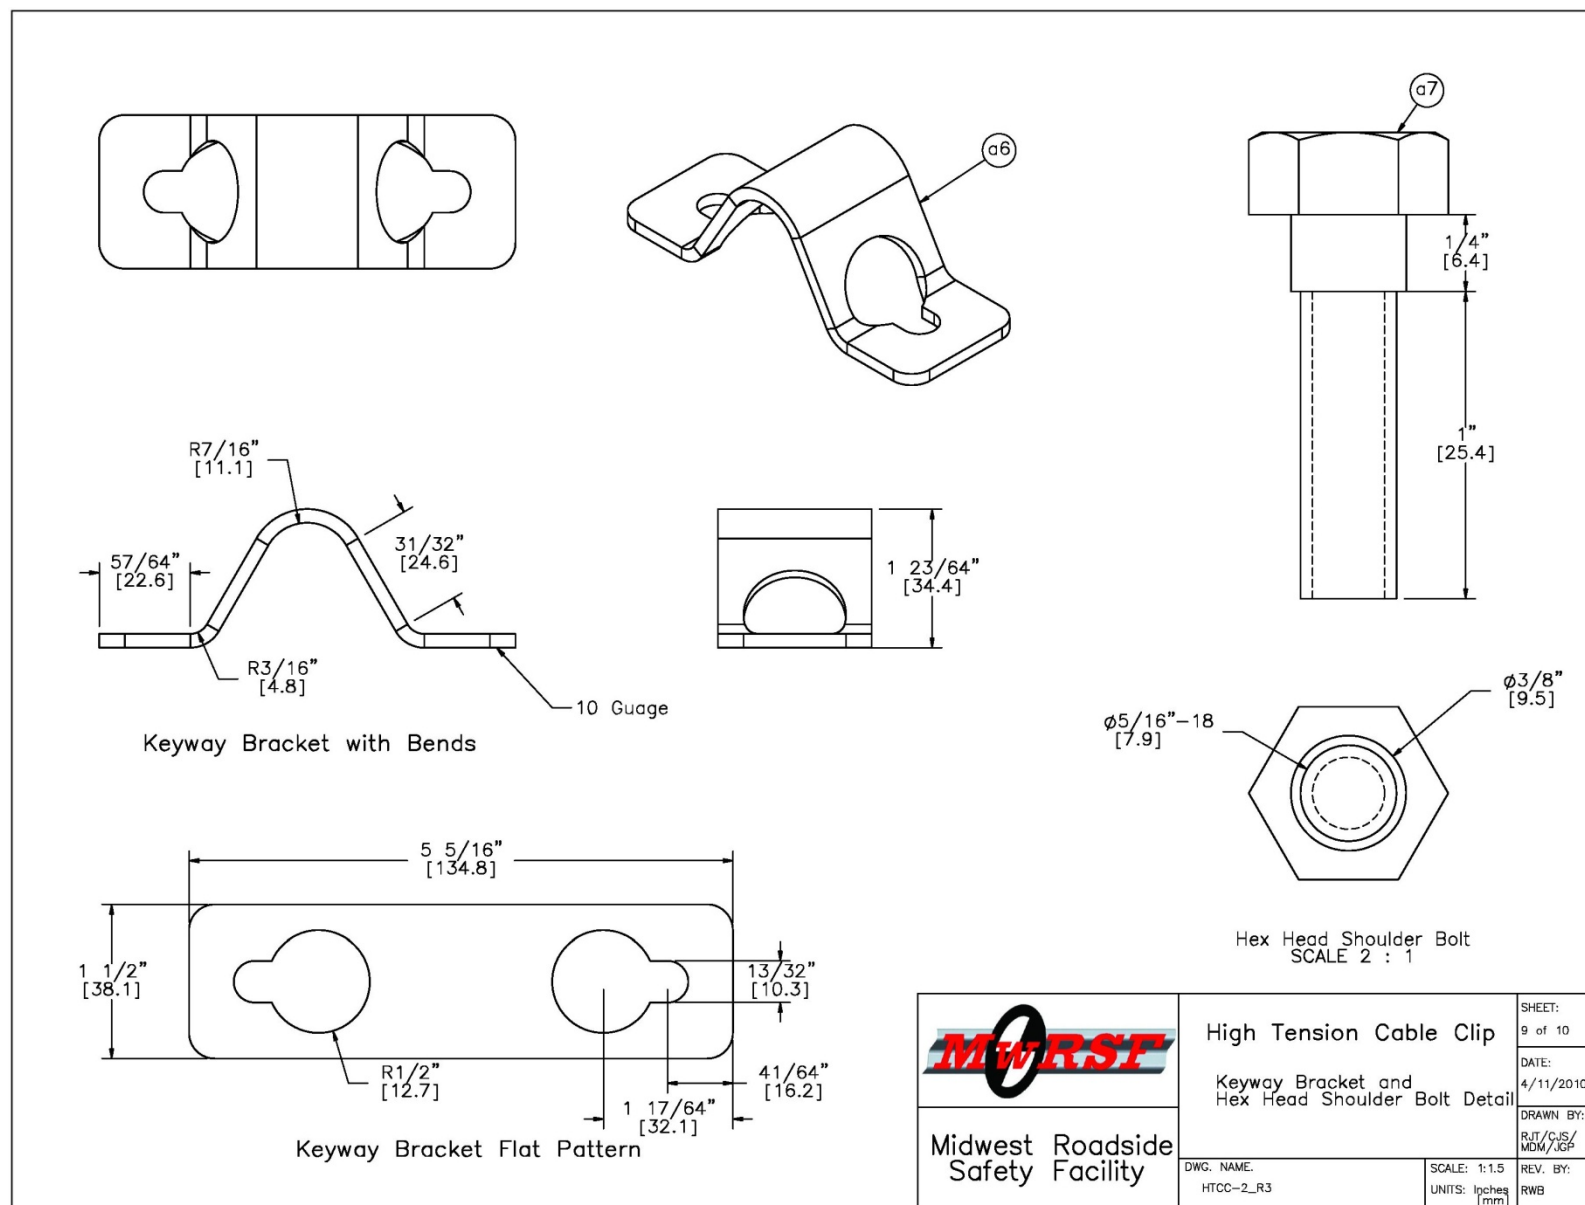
Keyway Bracket and Bolt Detail, Test No. HTCC-2
